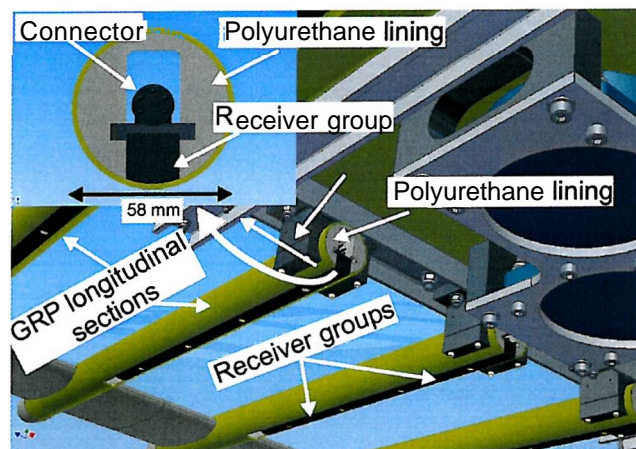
Close-up and cross sections of a longitudinal section with a receiver group. The cross sections are lined with polyurethane foam holding the receiver group whose bottom is shaped to the tube section. The free space in the longitudinal section holds the connecting cables of the group and is water filled during deployment.
